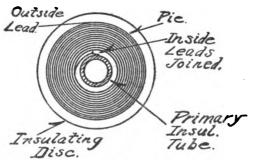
A.—SECTIONAL VIEW OF A SECONDARY UNIT
